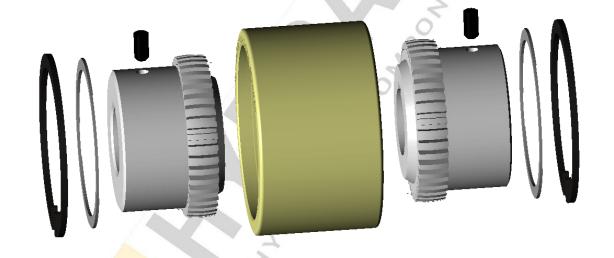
DENTEX® tooth coupling, type B4R - assembly
